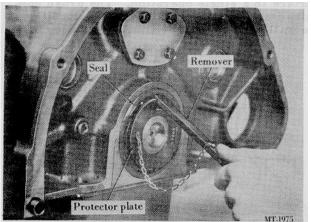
Removing Rear Main Bearing Cap Oil Seal from Crankshaft with Engine in Chassis Using SE-1941 Remover
